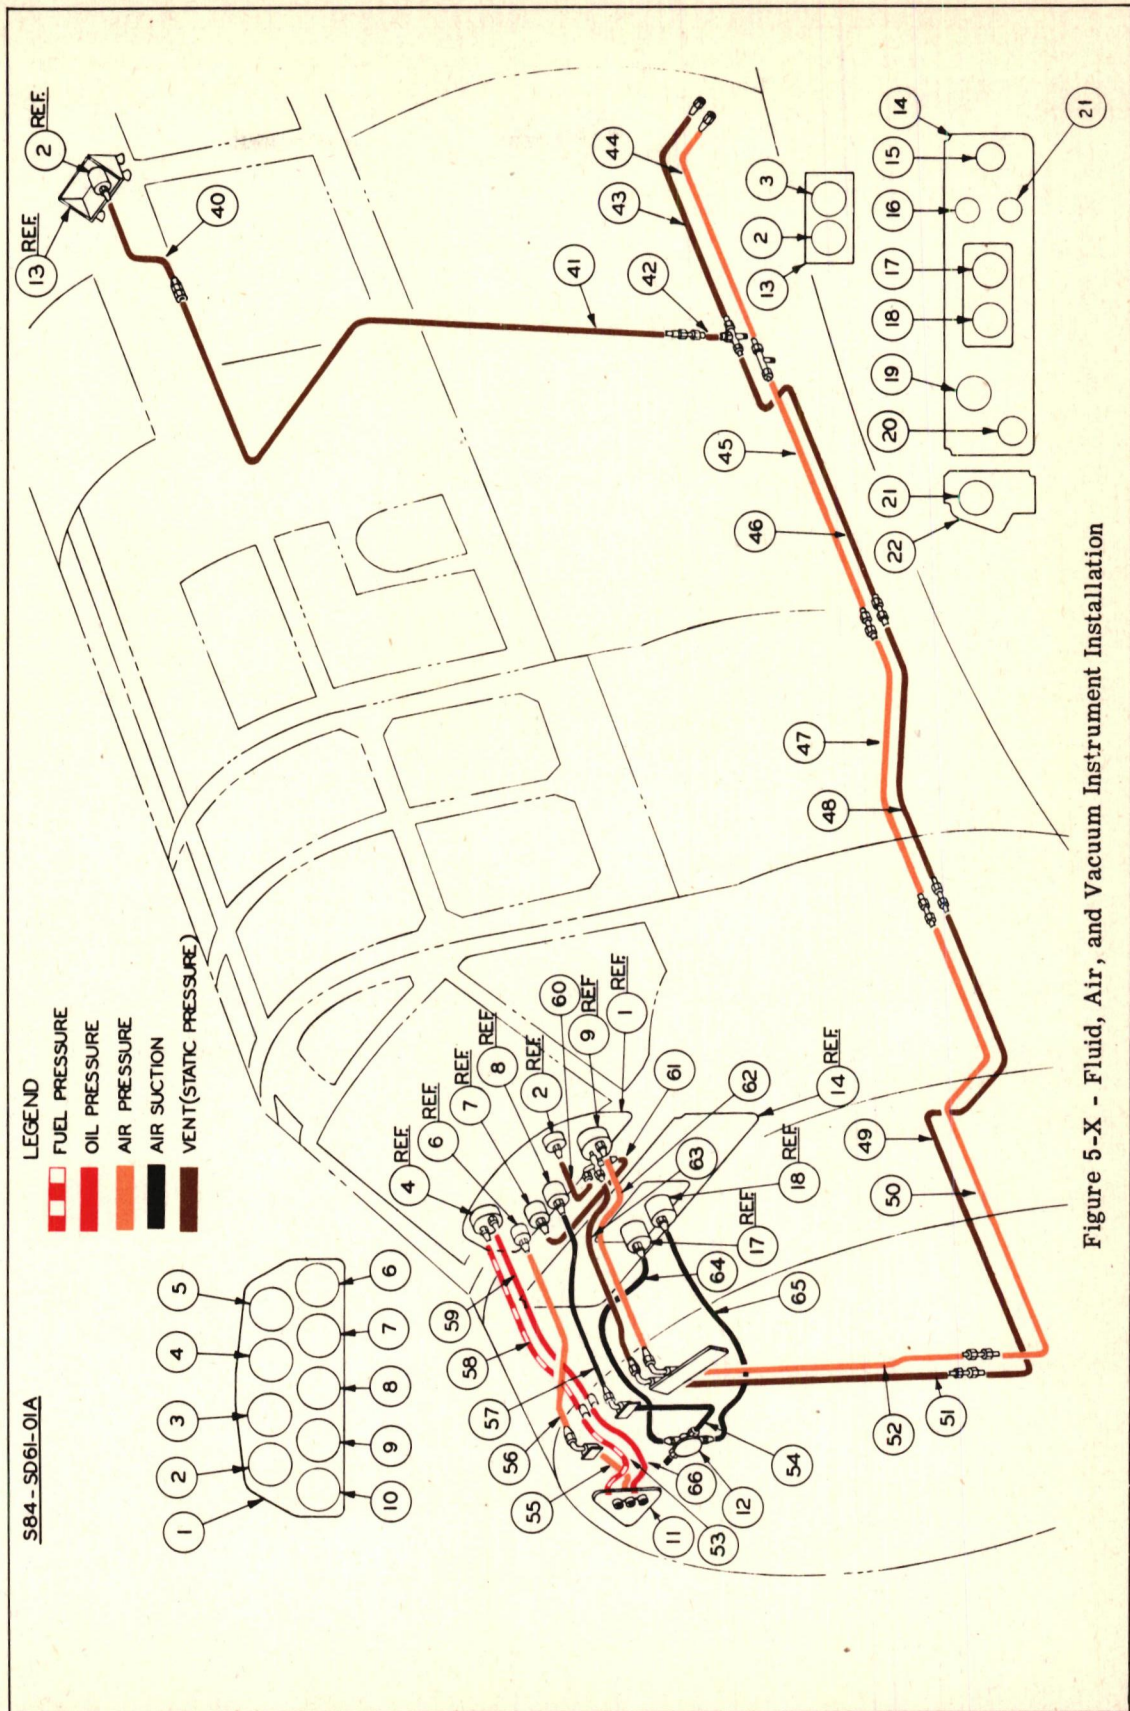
X - Fluid, Air, and Vacuum Instrument Installation
